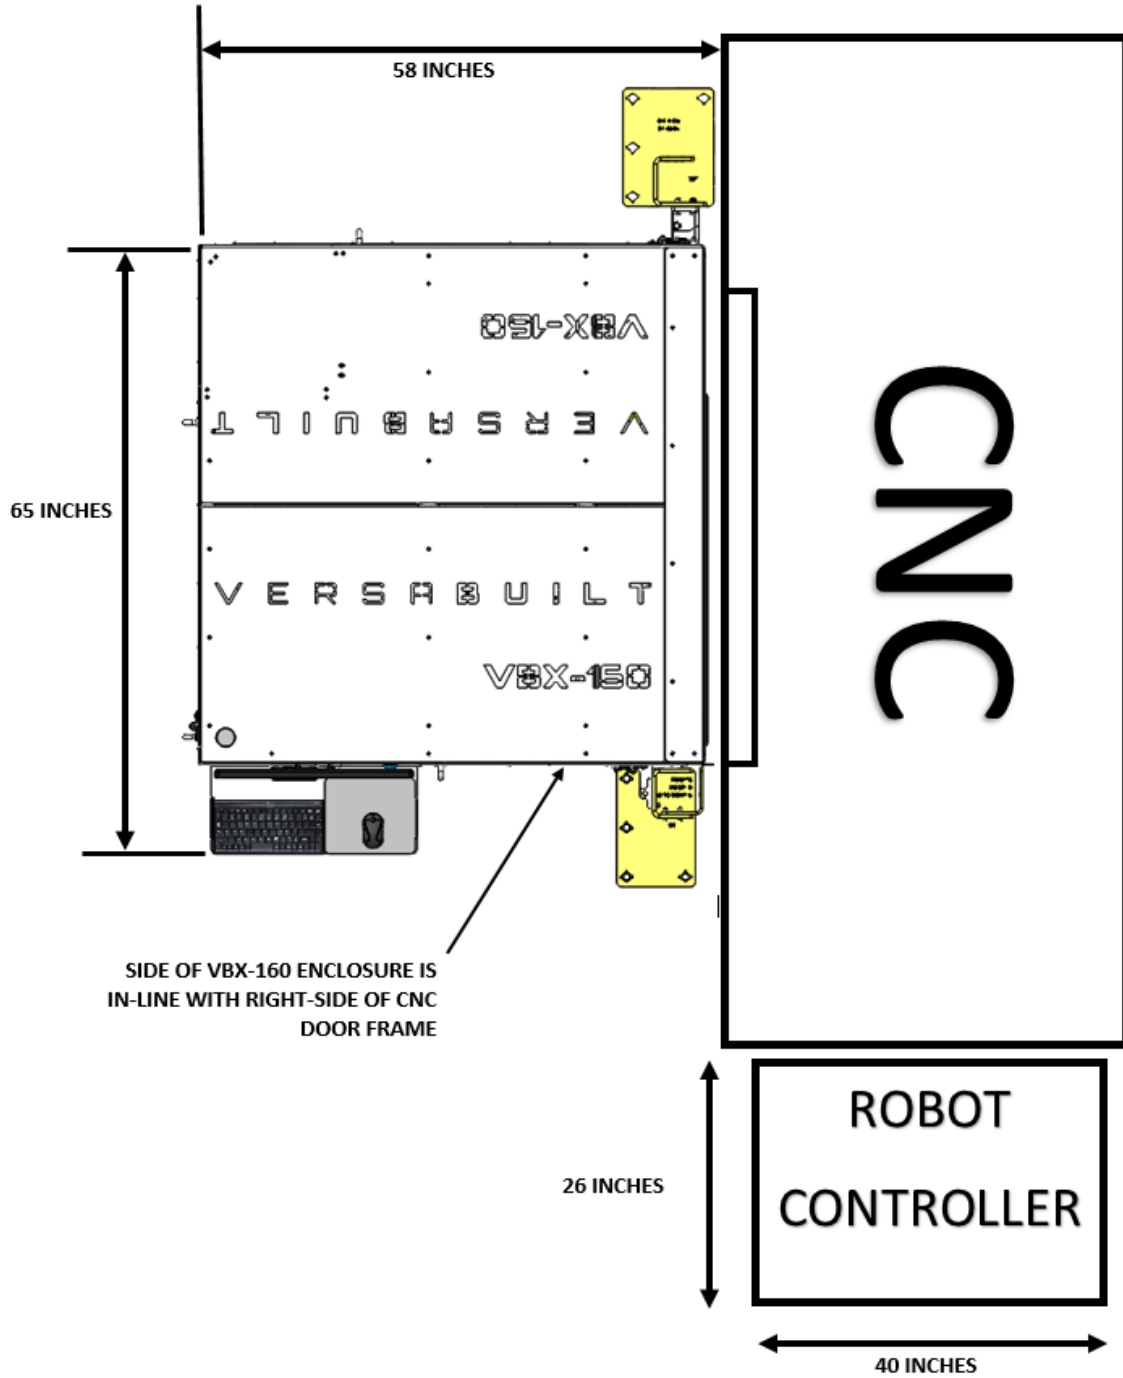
Top View, dimensions when VBX-160 is engaged with CNC *note: robot controller can be placed on either side of the CNC
